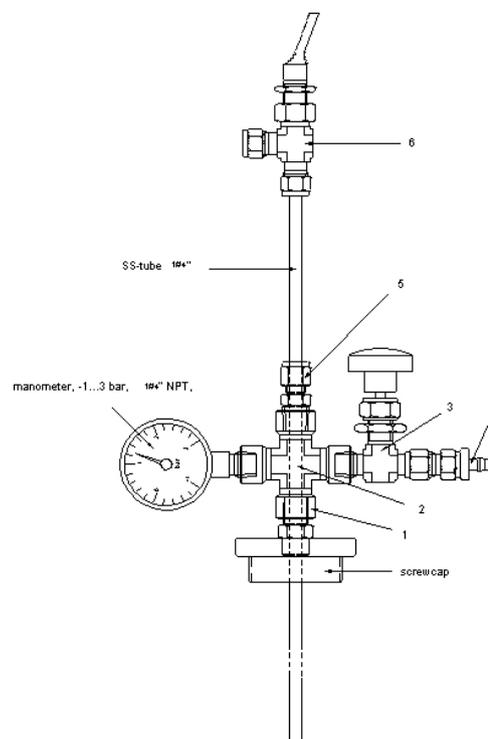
Sketch of water dispensing assembly for stainless steel tanks.
